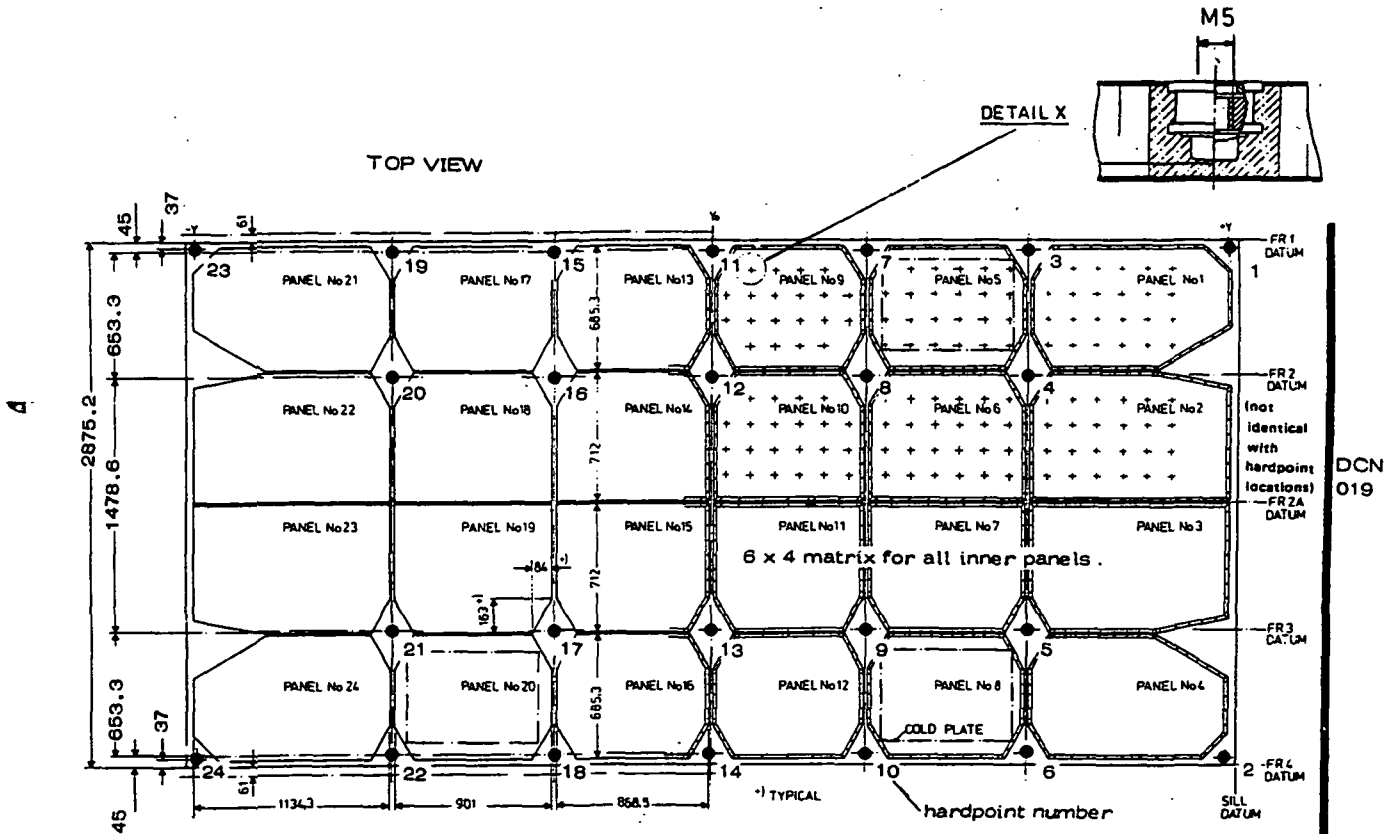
15 b: Inner Pallet Surface - Developed View
